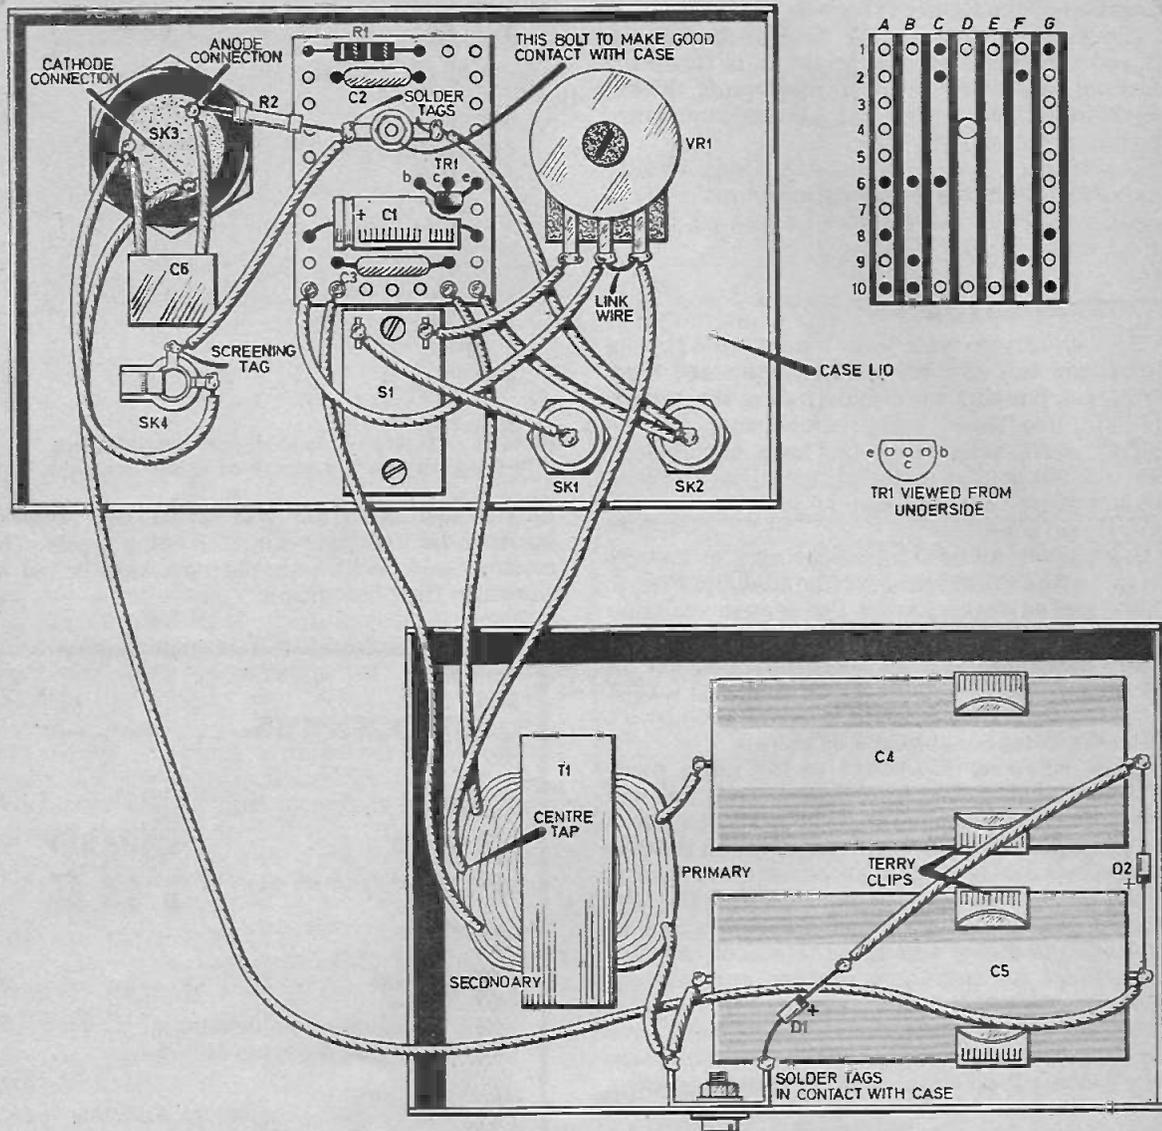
(above). Assembly and wiring details within the aluminium case.
